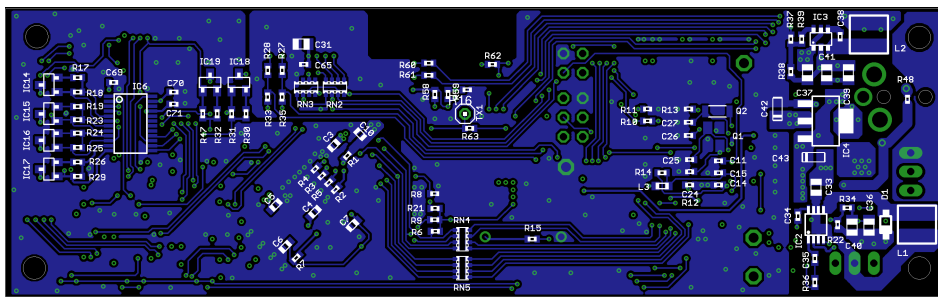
Real-size PCB image of the final board - BOTTOM side (mirrored).
